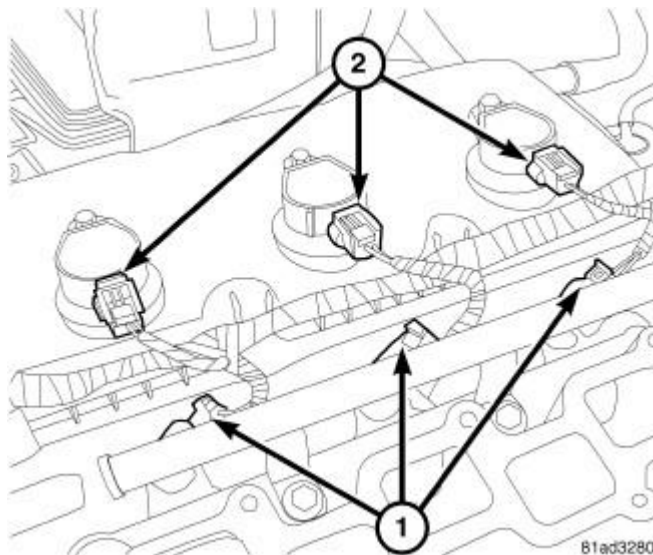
COIL AND FUEL INJECTOR CONNECTORS
